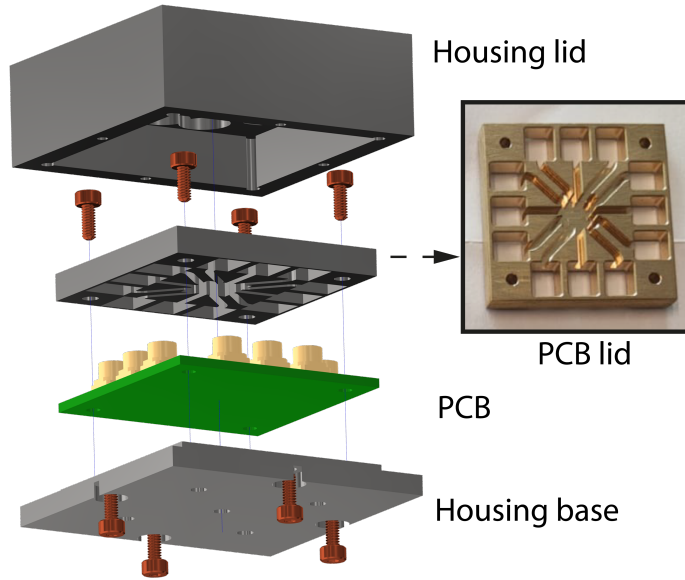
Housing design 3D assembly view showing: Housing lid, housing base and PCB lid with picture of the inner face.
